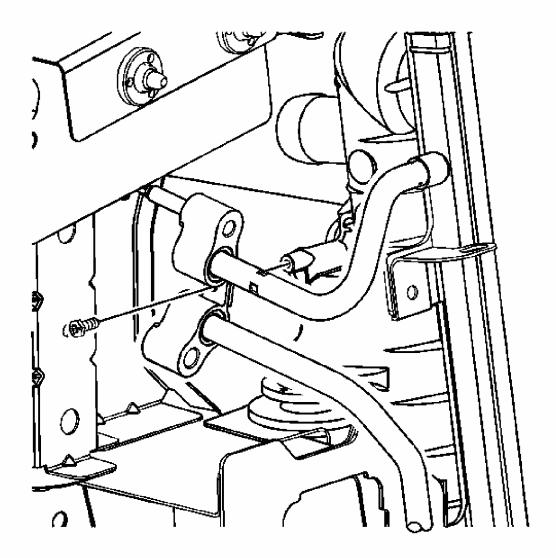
Removing/Installing Condenser Lines Courtesy of GENERAL MOTORS CORP.
